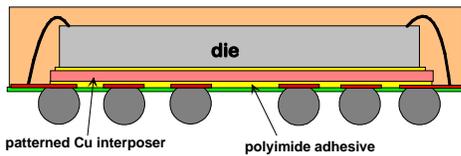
Enhanced BGA in a CSP format. The copper interposer enables a matched CTE to the printed circuit board.
